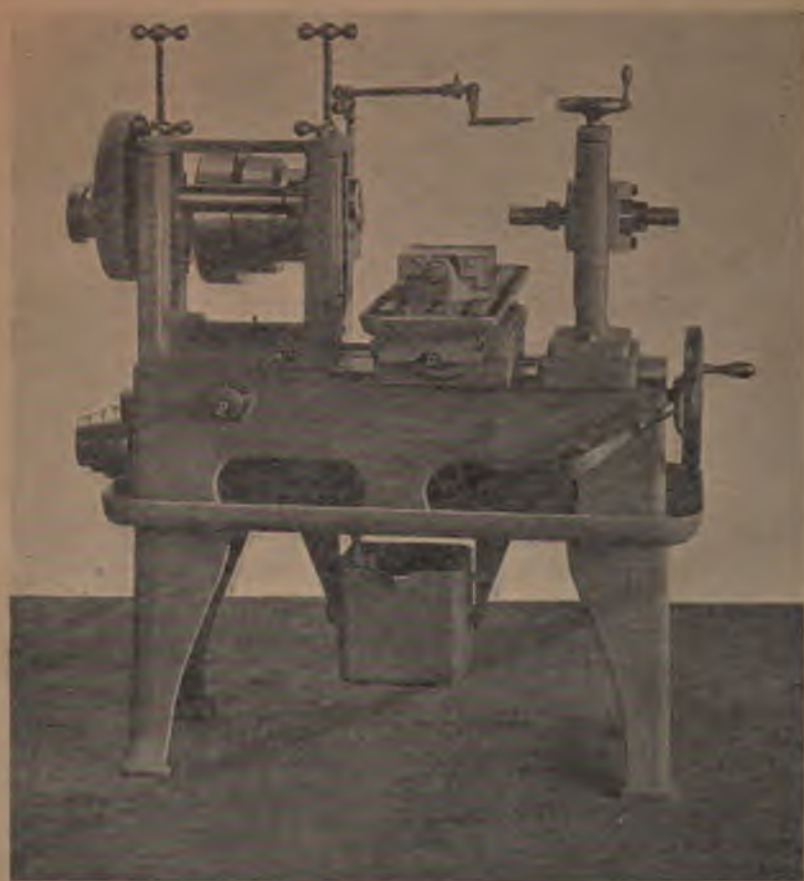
Lincoln Miller. (Pratt & Whitney Co.)
